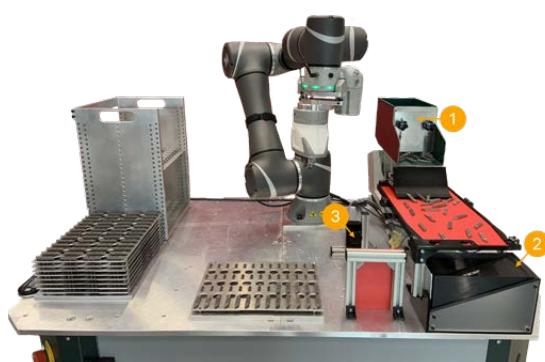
Modified cell. (1) Parts feeding system, (2) overflow container, (3) parts inspection camera.
